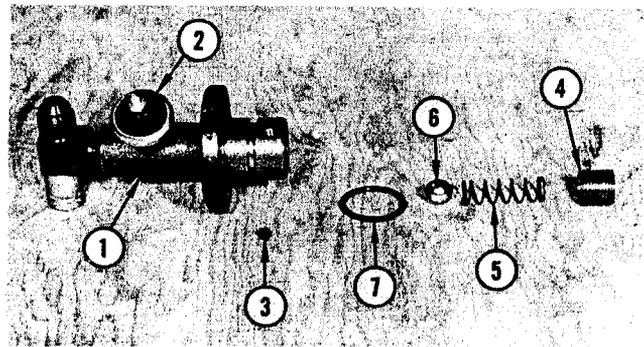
EXPLODED VIEW OF RELIEF VALVE
